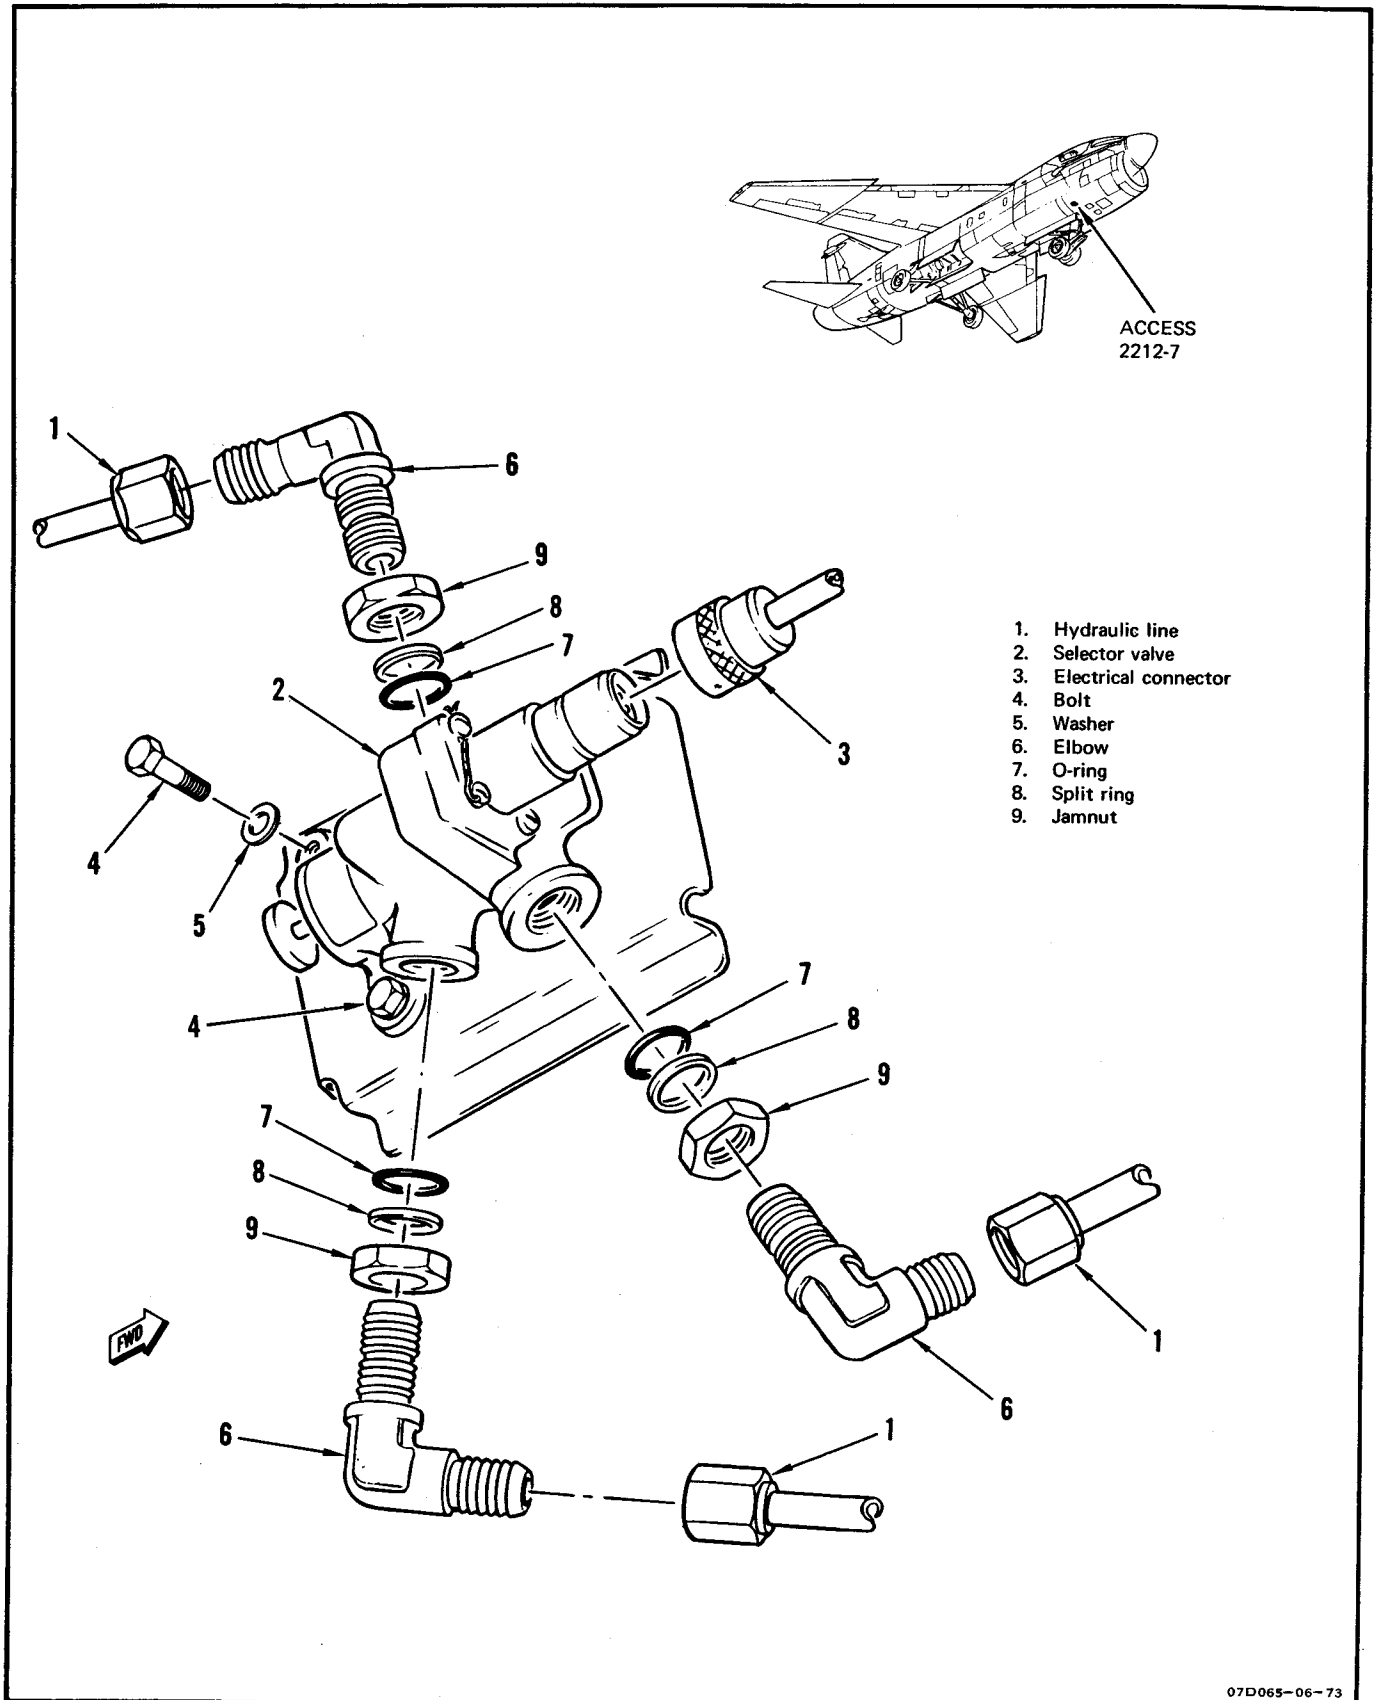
Nose Gear Steering Selector Valve Removal and Installation
